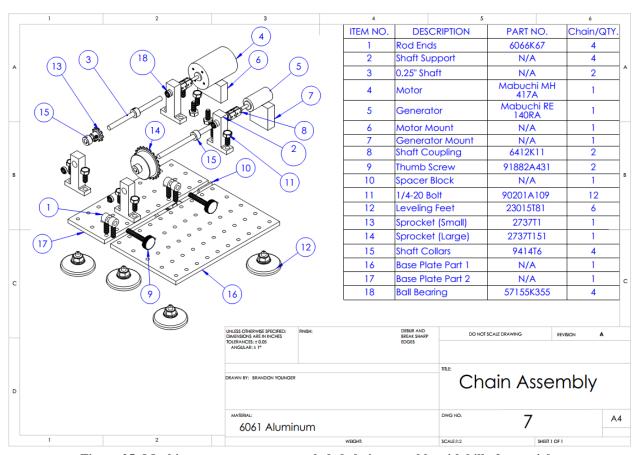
Machine components test, exploded chain assembly with bill of materials.
